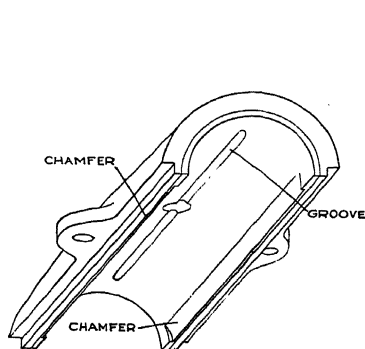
Proper method of chamfering and grooving a two-part bearing. (Courtesy Socony-Vacuum Oil Co.)
